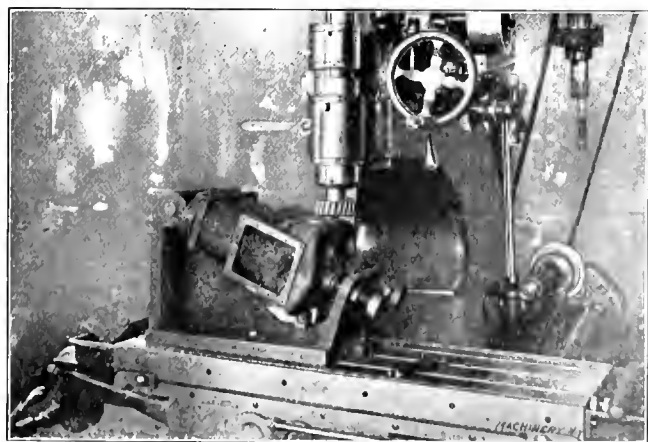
Fixture for Holding Cylinder while Facing Exhaust Pipe Flange Bosses
